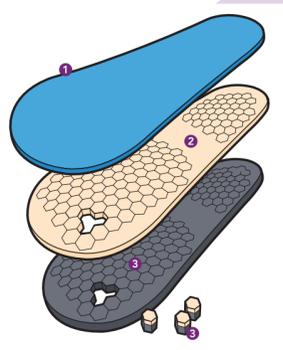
Kerraped® Plantar Ulcer insole cross-section
